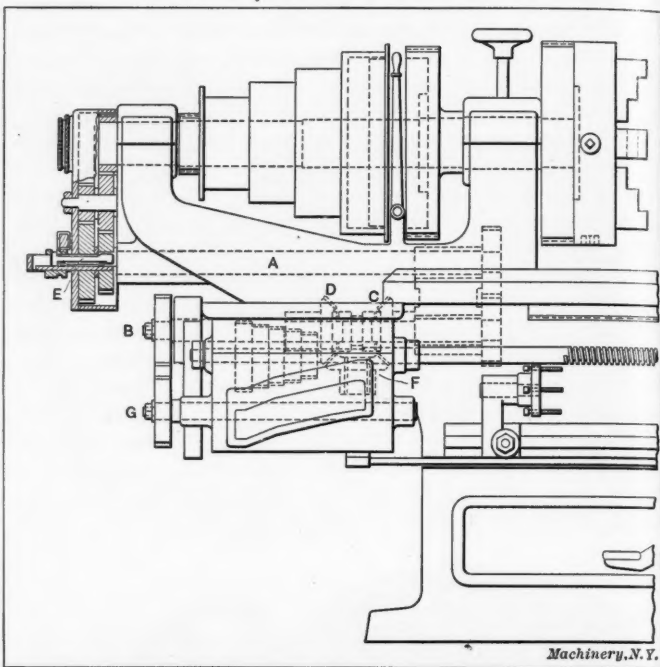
Detail showing the Feeding and Reversing Mechanism
